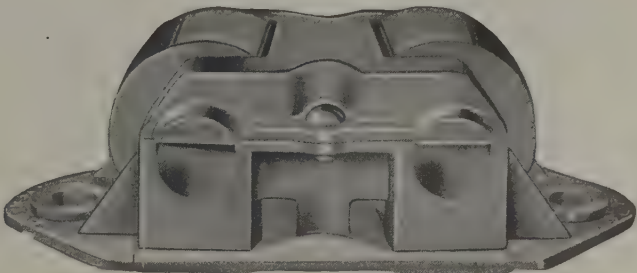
Barber Roller Side-Bearing for Freight Cars. Standard Car Truck Company.
